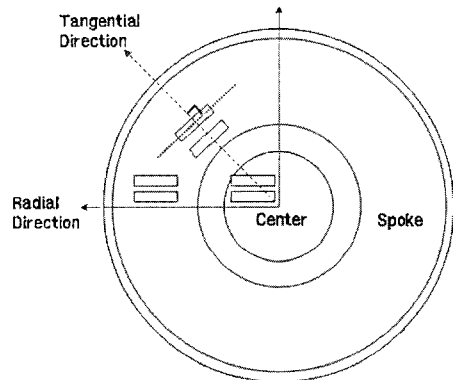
Tensile direction of test specimens of 6061 aluminum alloy
